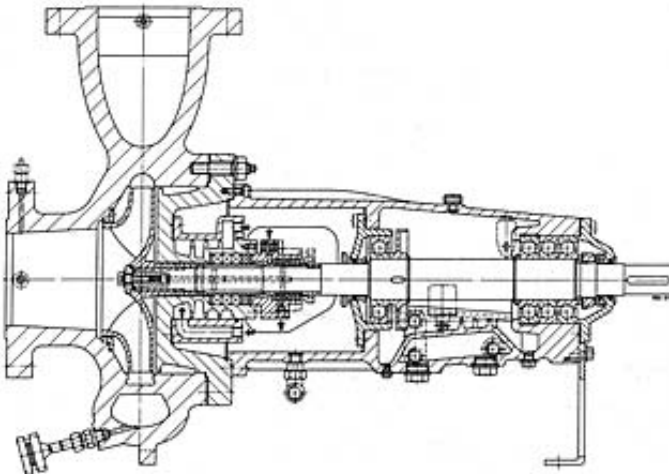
Circulating pump with cooled soft packed stuffing box for forced-circulation boiler plants
